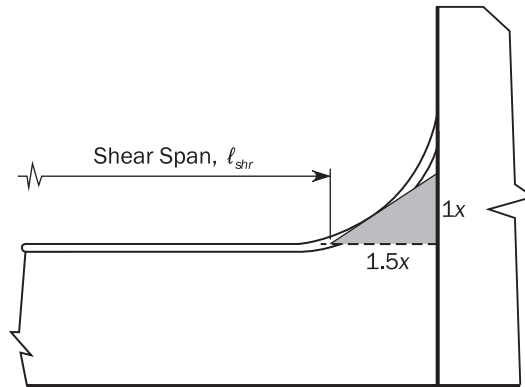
Effective shear span of stiffeners supported by web stiffeners (double skin construction)
